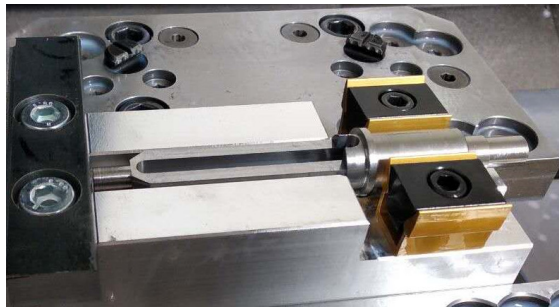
A clamping platform for manufacturing of the hollow shaft.
